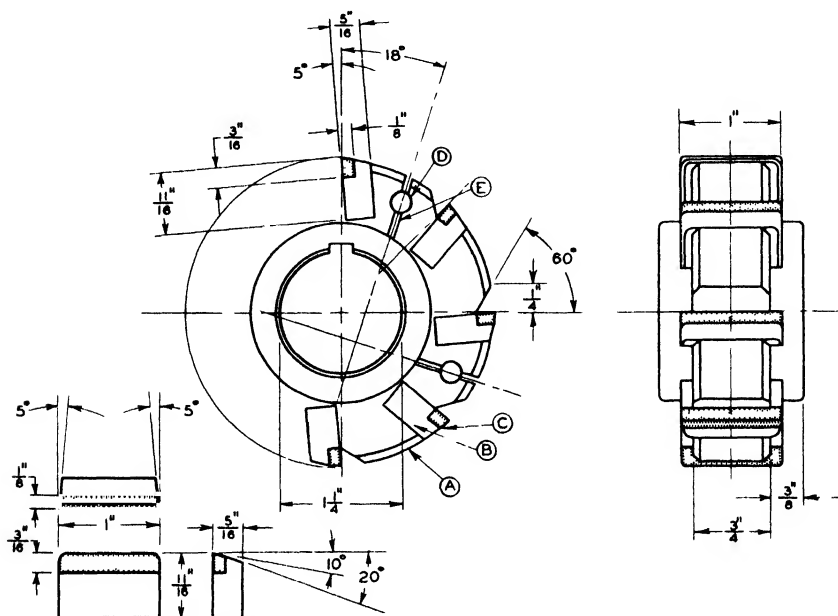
A Carbide-Tipped, Overlapping, Staggered-Tooth Cutter Used for Slab Milling
